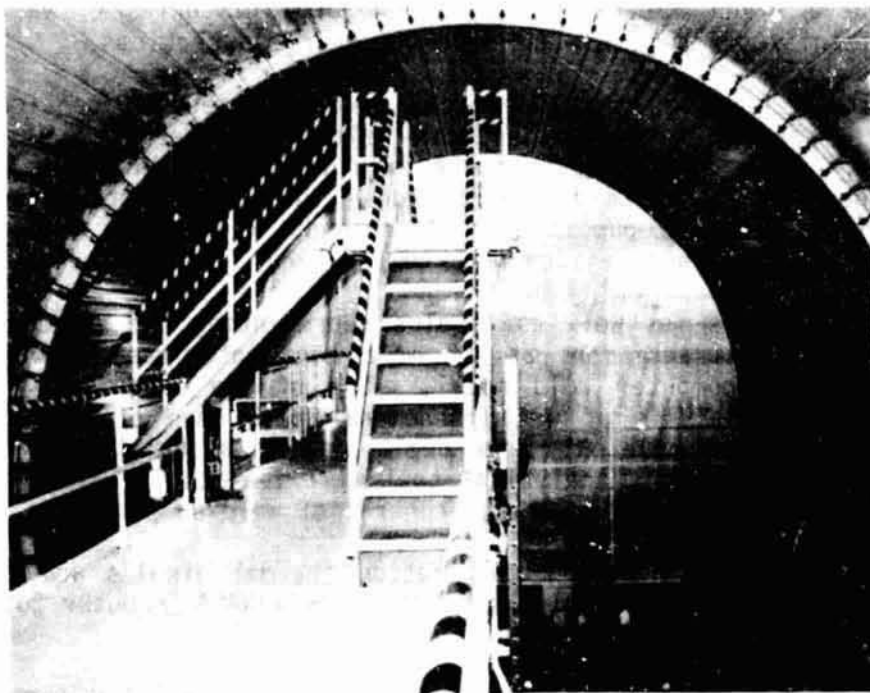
Internal View of ET Barrel Assembly with Weld Attachment Clamps Installed.
